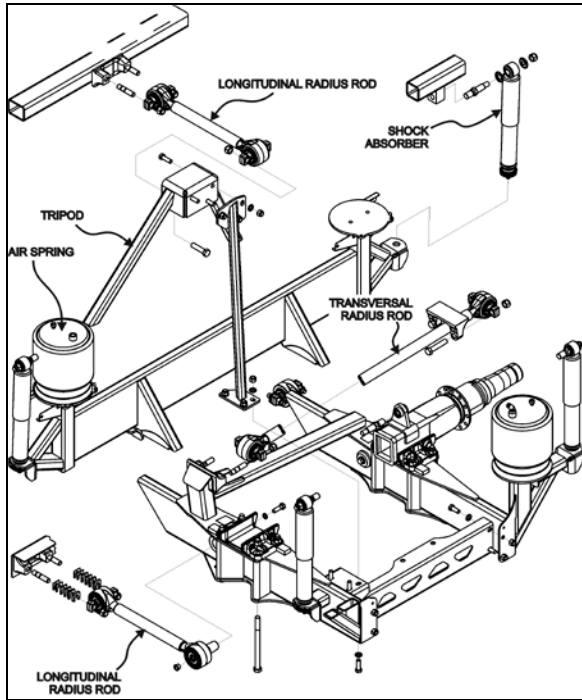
DRIVE AXLE, DETAILS OF REAR SUSPENSION
